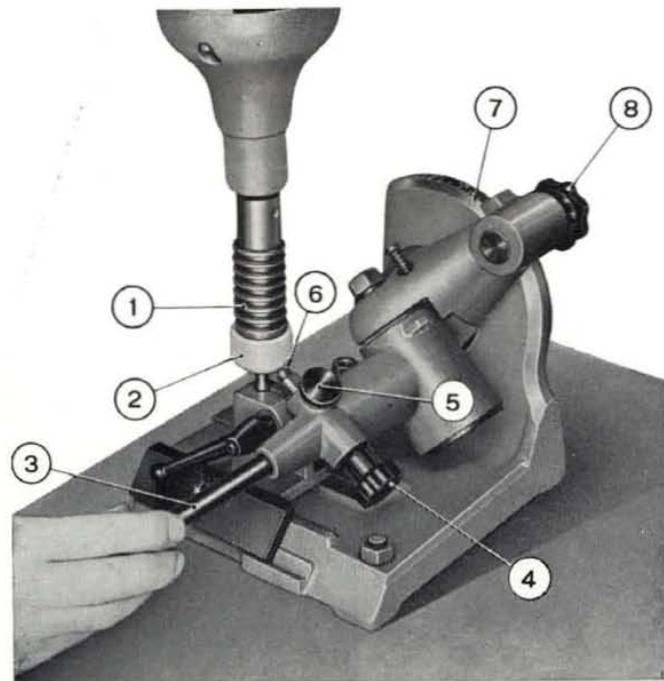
Dressing taper grindwheel A. 94084 on dressing machine Ap. 5050.
